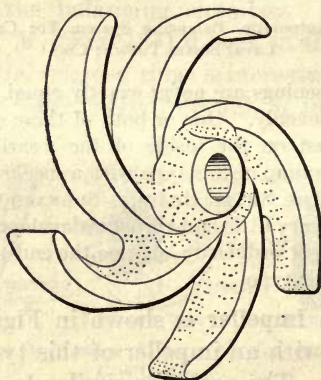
A.—Perspective View Of An Open-Type Centrifugal-Pump Impeller.
